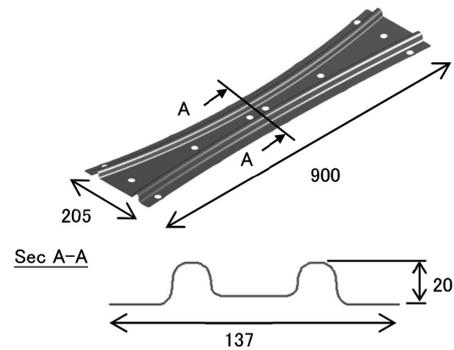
Schematic drawing of press formed sample that imitates roof cross
